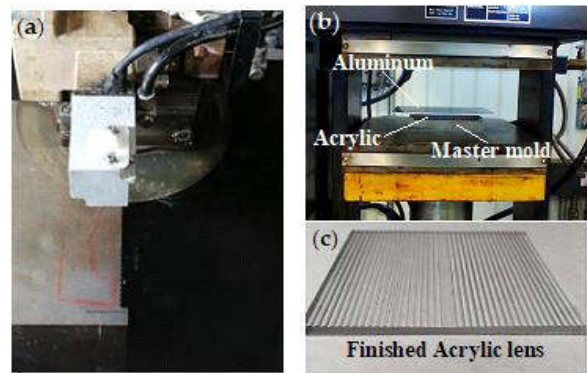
Sub-processes for hot embossing method: (a) Wire-EDM cutting for a steel master mold; (b) Compressing a PMMA acrylic sheet into the master mold at elevated temperature and pressure; (c) Hot-embossed finished acrylic lens
